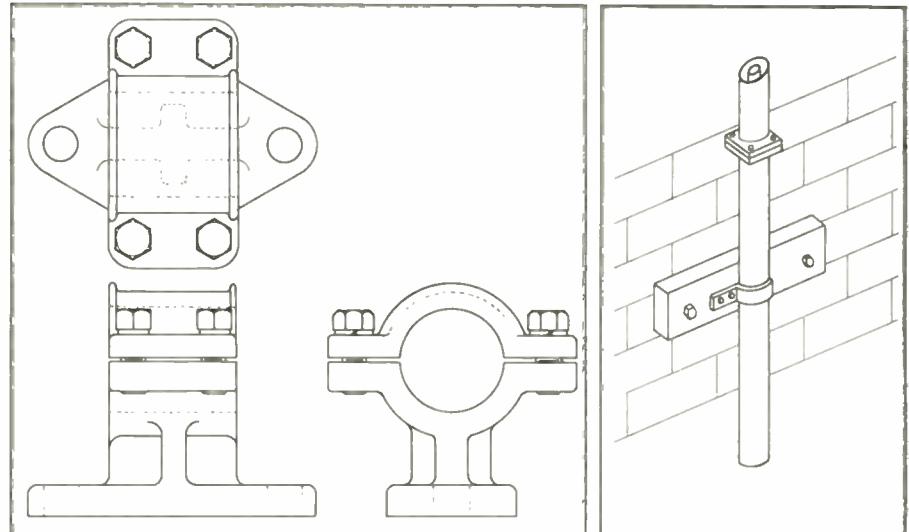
, LEFT. DETAIL OF RIGID SUPPORT TO CLAMP COAXIAL LINE. FIG. 19, RIGHT. PIPE STRAPS OR CONDUIT CLAMPS PERMIT LONGITUDINAL MOTION
